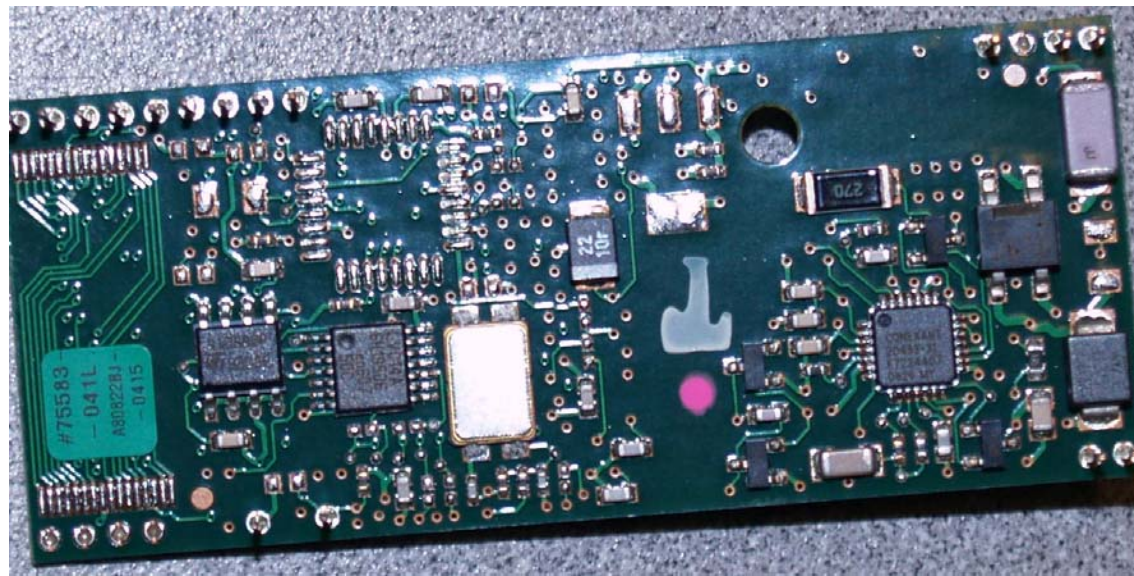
HomeBase (HB-100) – Modem PCB – bottom side
